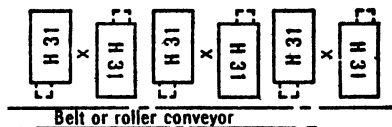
Machines Laid Out Perpendicular to a Belt or Roller Conveyor. Operator turns through 90° to use the conveyor.
